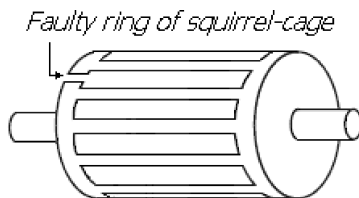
Rotor of three-phase induction motor with faulty ring of squirrel-cage.
